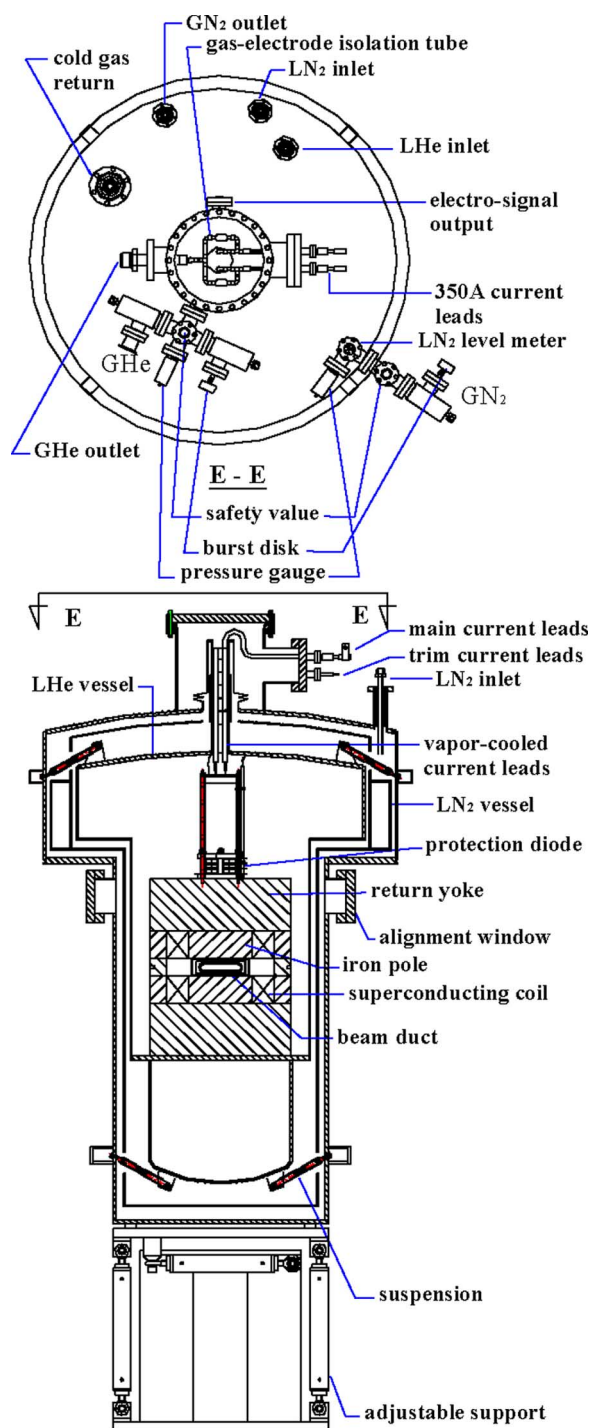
Mechanical structure of main part of magnet: top view (upper drawing) and side view (lower drawing).
